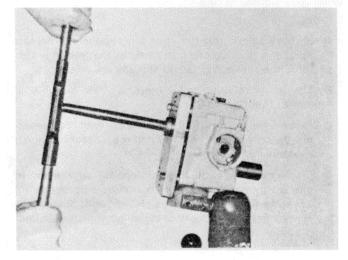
G-12A. Reaming Drive Shaft Bushing with ST-490
